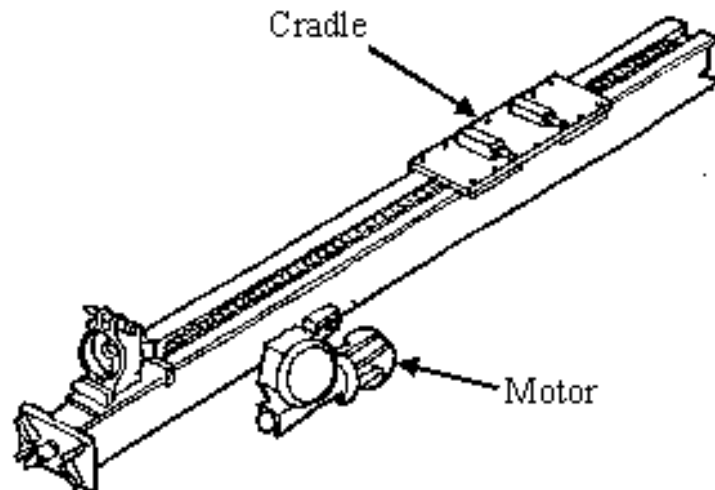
Feed with feed motor and cradle (Atlas Copco Manual, 1982)
